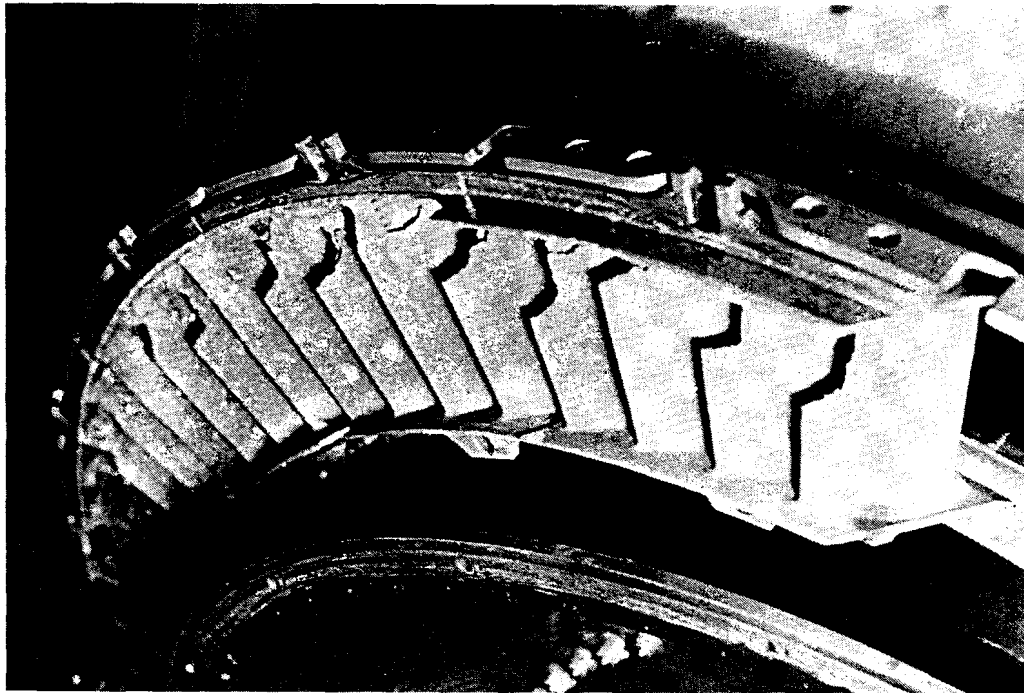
HP TURBINE DISC BLADE ASSEMBLY, WITH FAILED ROOT IN POSITION
